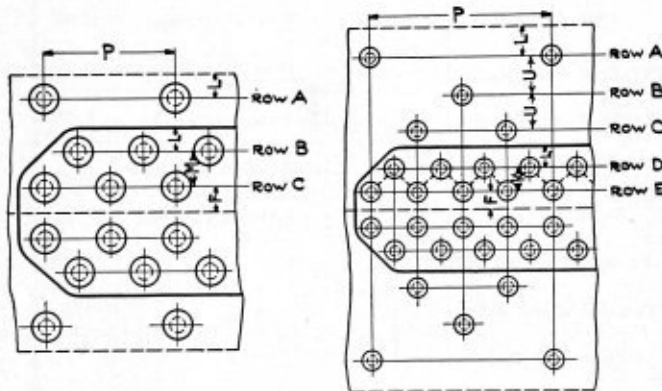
Sextuple Riveted Seam Fig. 2.—Decuple Riveted Seam
